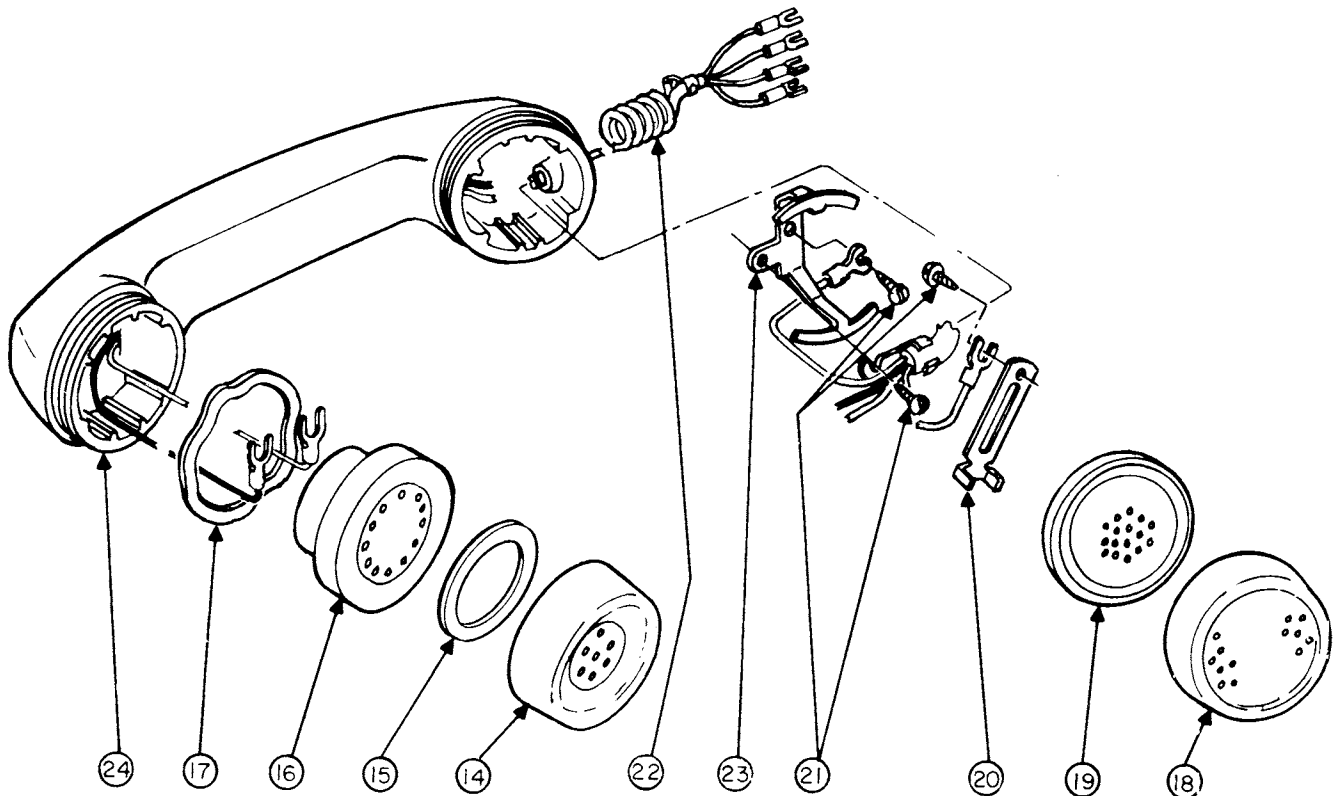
Exploded View of Handset for the Type 90M Telephone Set.
